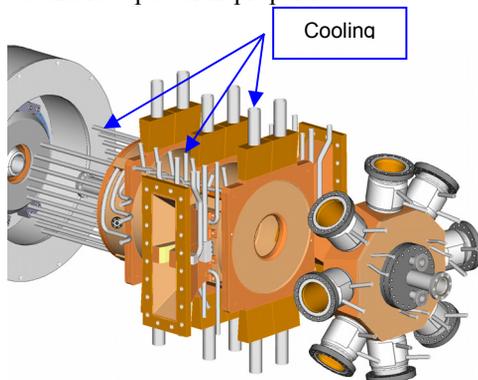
Exploded view of the photoinjector showing the cooling passages.
